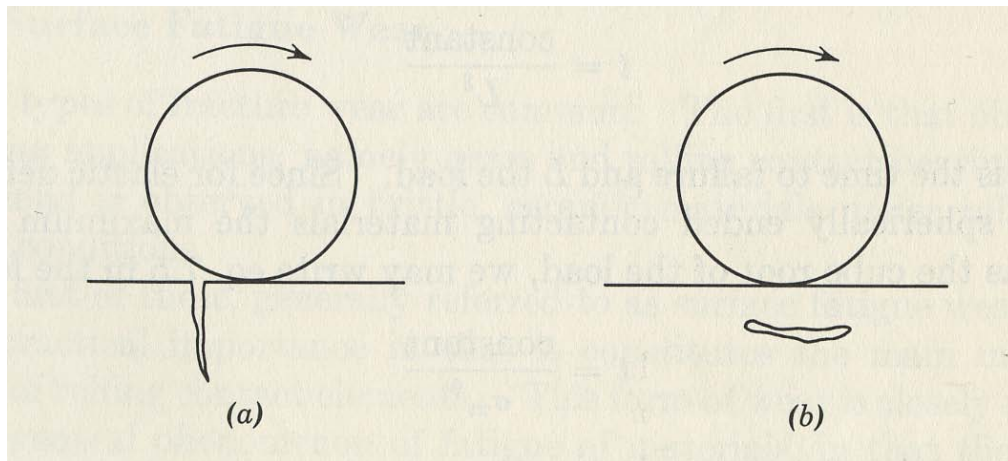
Illustration of early stage in surface fatigue (a) Surface crack (b)
